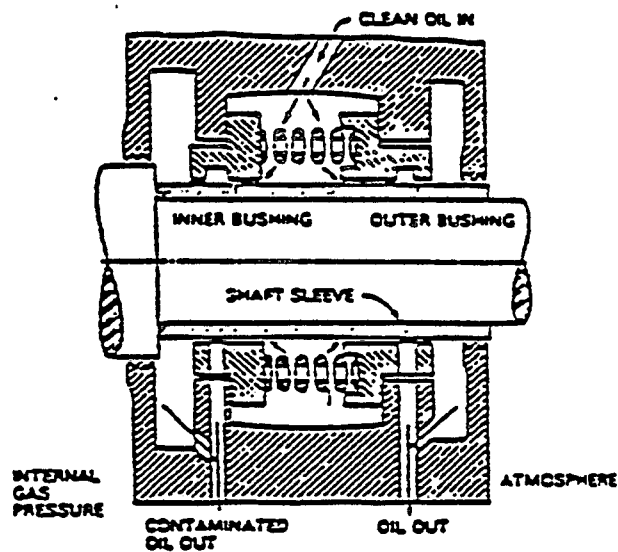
Liquid film shaft seal with cylindrical bushing.
